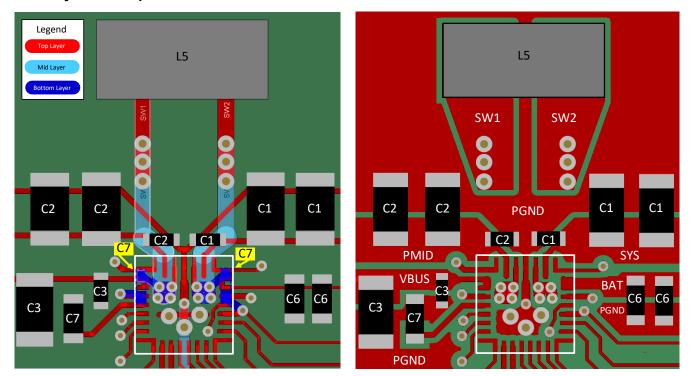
PCB Layout Example (Top Layer Copper Pours Removed on Left, Shown on Right)
